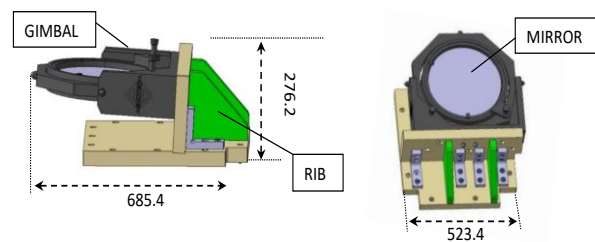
Diagram showing two views of the M3 sub-assembly with key dimensions in millimetres.
